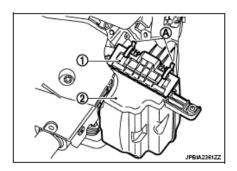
Identifying Air Cleaner Case And Holder Courtesy of NISSAN MOTOR CO., U.S.A.
